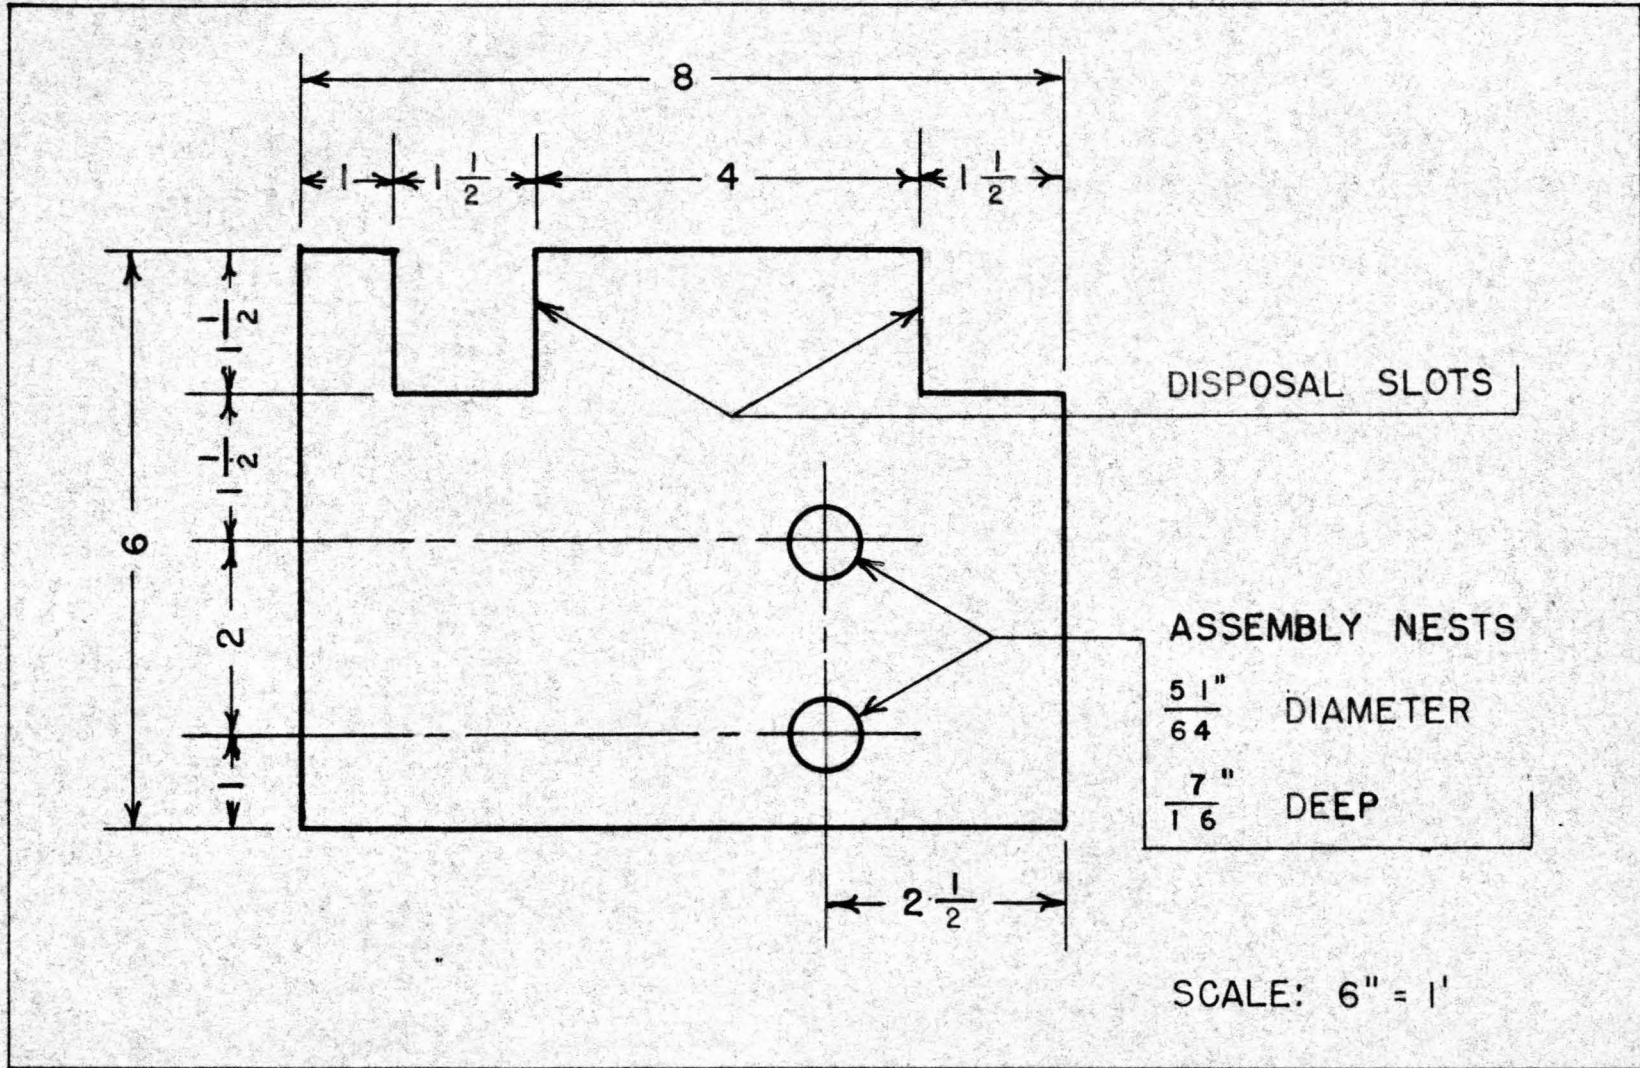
LAYOUT OF NONSYMMETRICAL ASSEMBLY FIXTURE.
